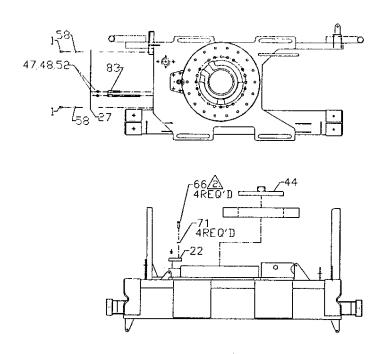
BASE & 6.4m OUTRIGGER ASSEMBLY (41709801)
